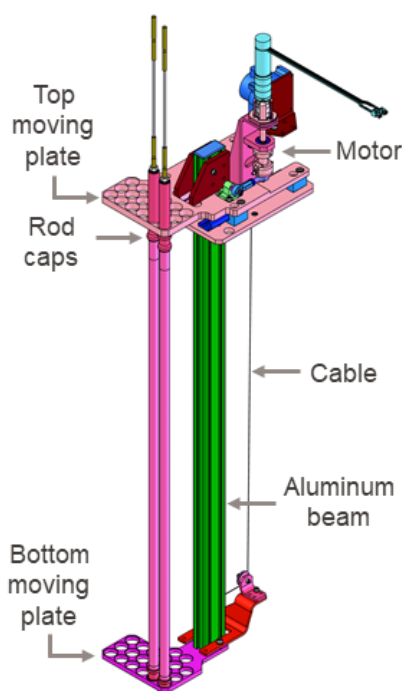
CAD model of the COLIBRI fuel rods oscillator.
